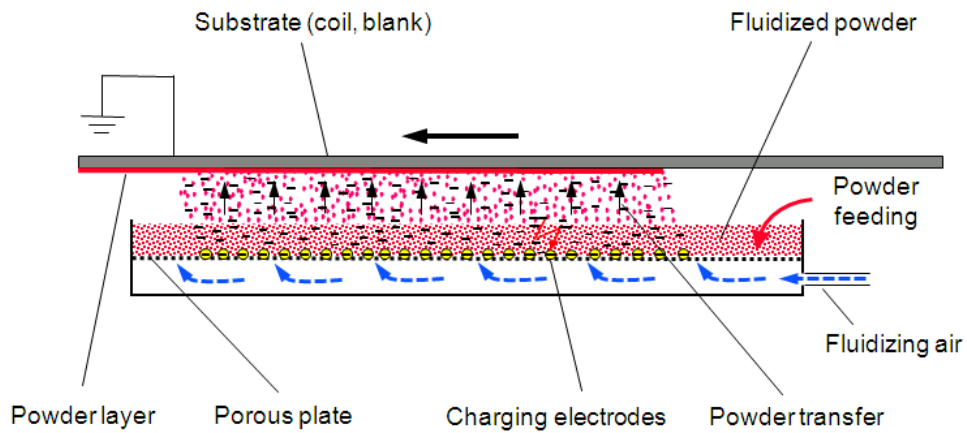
Principle of the electrostatic fluidized bed technique being further developed for powder coating of coils and blanks without spray guns.
